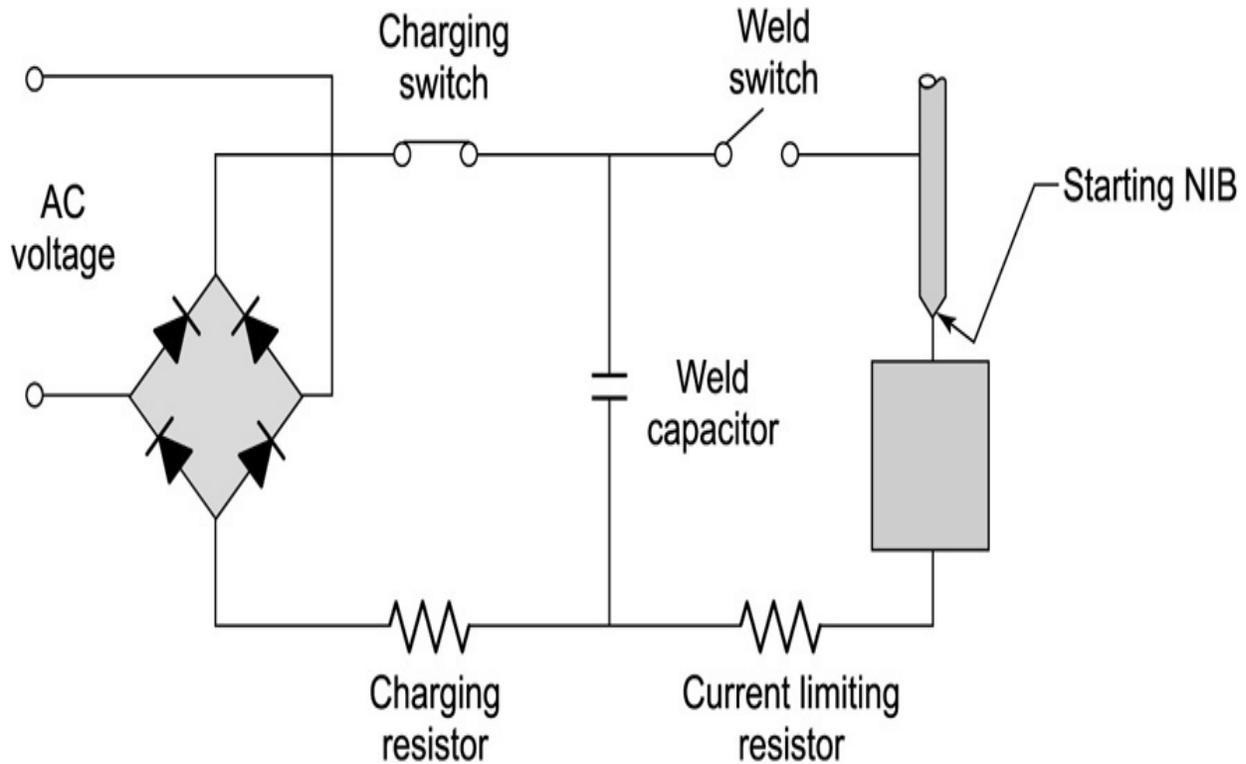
Circuit for capacitor discharge welder.
